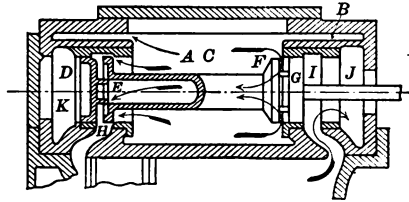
DOUBLE ADMISSION PISTON VALVE
